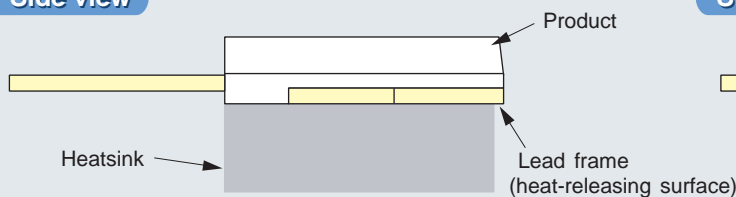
b Mounting a heatsink (example of acceptable mounting)
